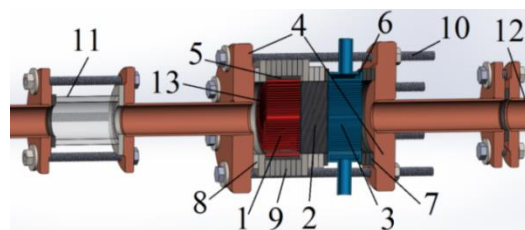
Stage of the experimental engine in section: 1 – hot heat exchanger; 2 – regenerator; 3 – cold heat exchanger; 4 – connecting flanges; 5 – nichrome heater coil; 6 – cylindrical channel for coolant; 7 – paronite gasket – separator; 8 – asbestos gasket – separator; 9 – asbestos gaskets – heat insulators; 10 – bolted connections; 11 – quartz glass tube; 12 – resonator; 13 – thermocouple connection point
